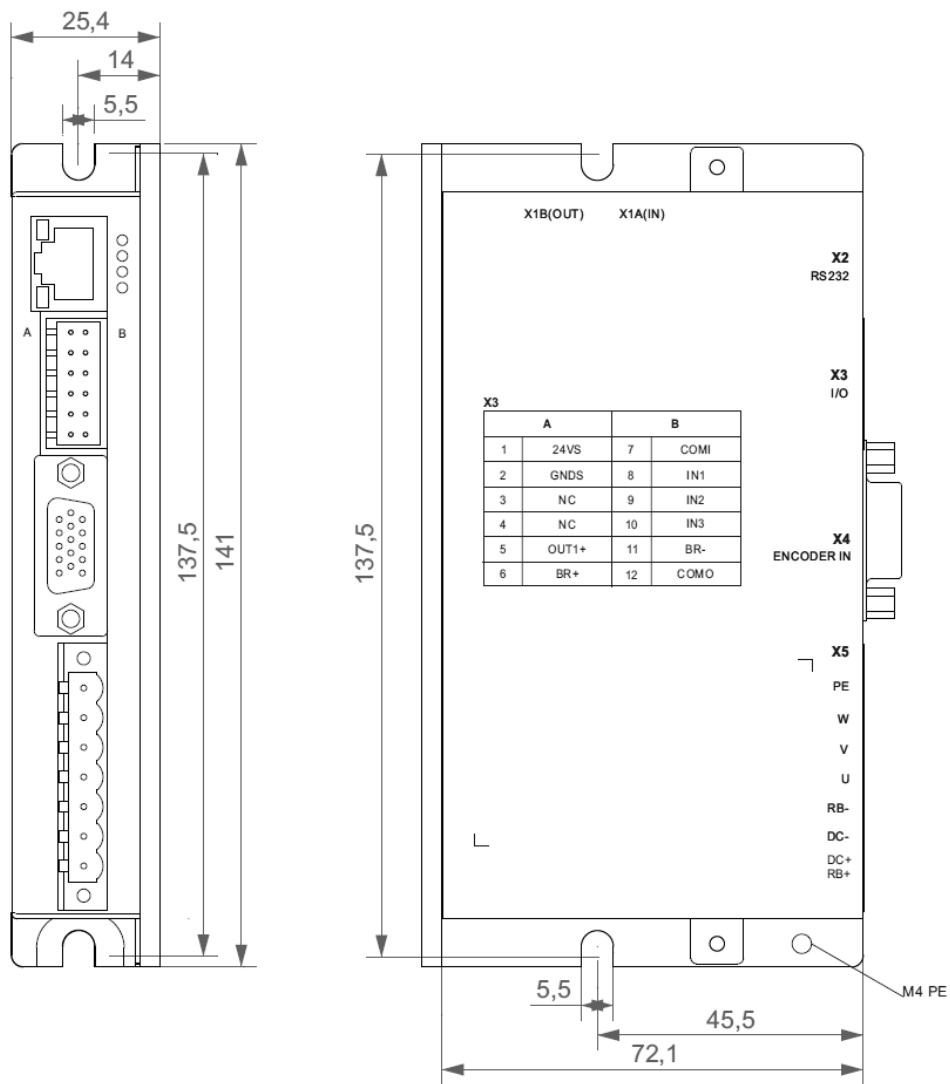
Dimensions in mm (front and side, E°Darc S05E/12E)
